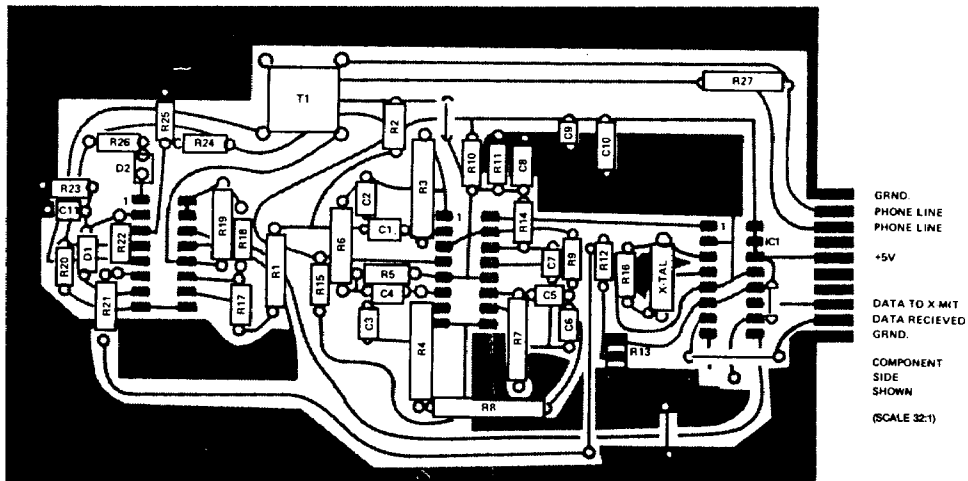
Complete FSK Modem Printed Circuit Board Layout
